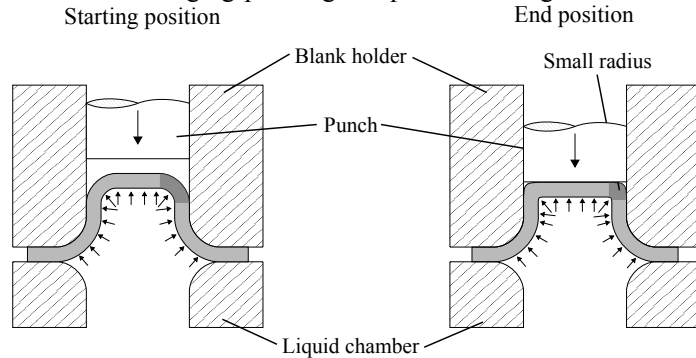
Bulging-pressing compound forming, which consist of two steps. The first step is hydro-mechanical deep drawing, the second step is bulging-pressing compound forming where the large radius is formed into a smaller radius limited by the sheet thickness.
